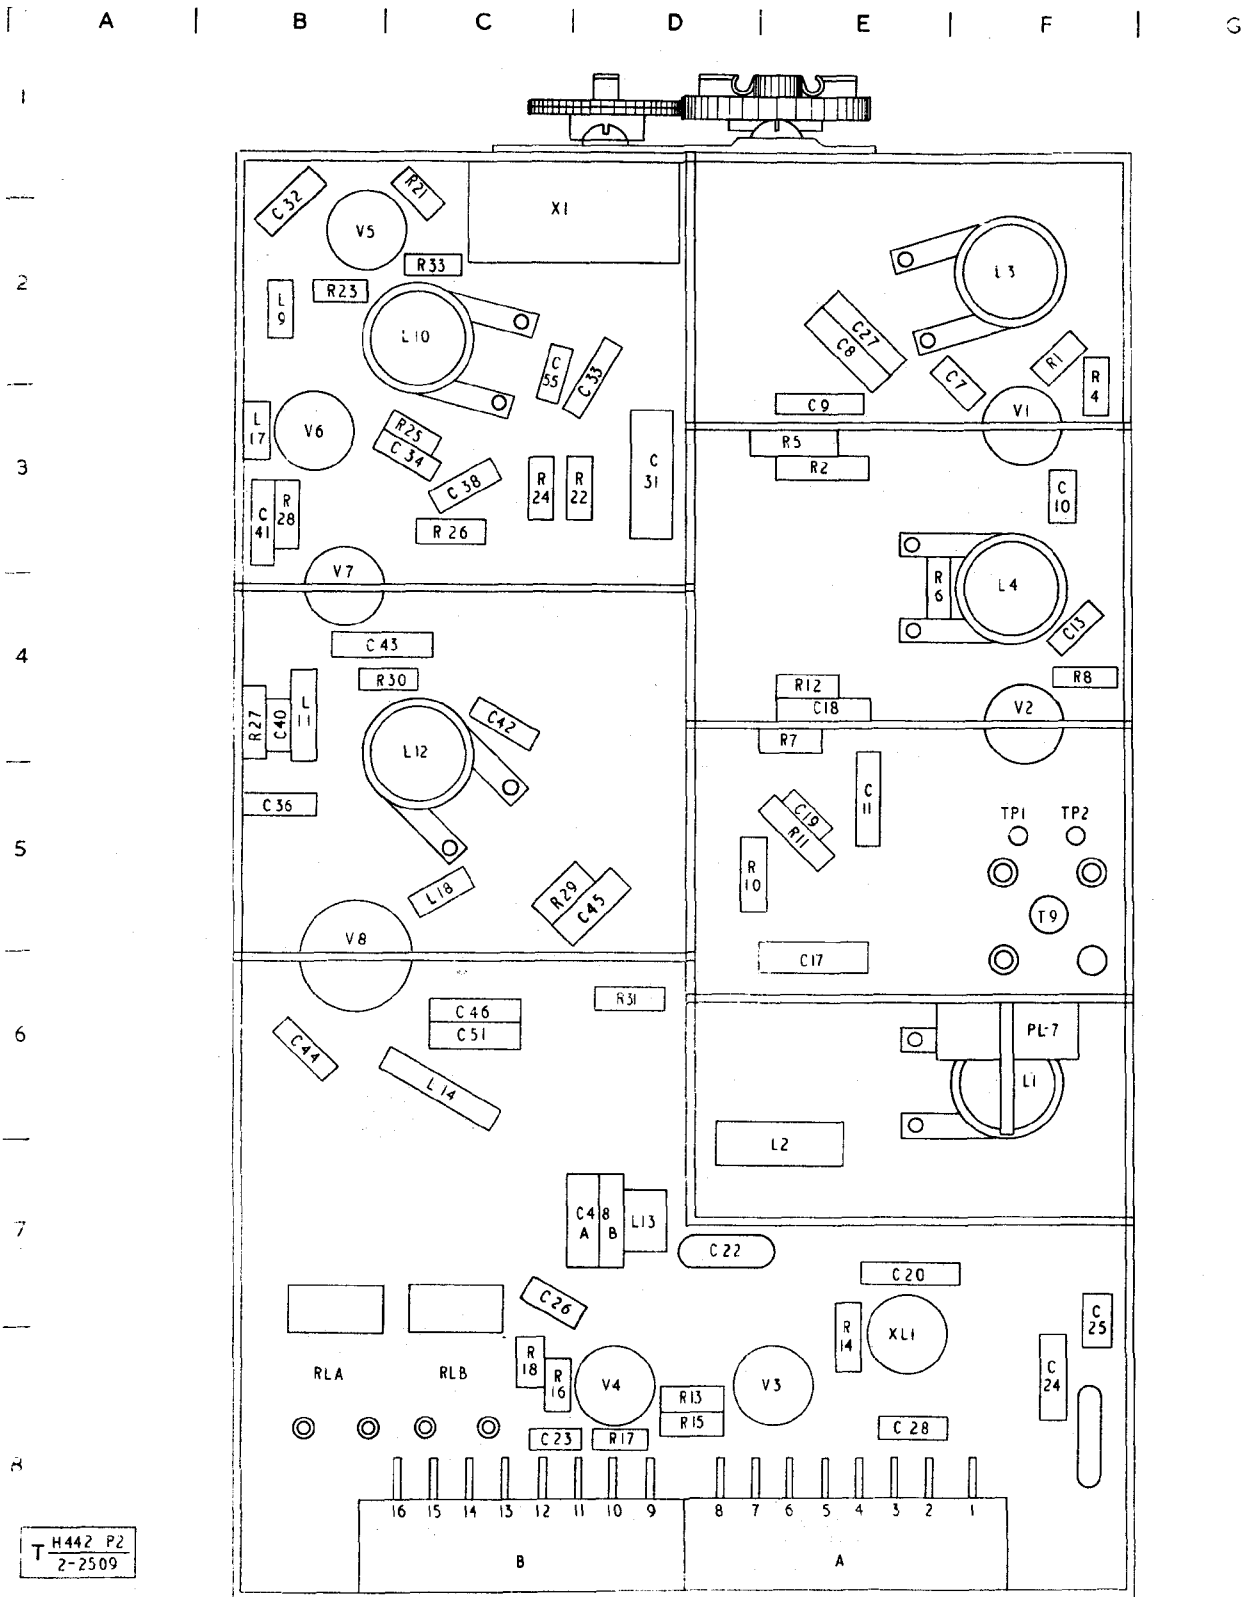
Transmitter-receiver sub-assembly, layout below chassis
